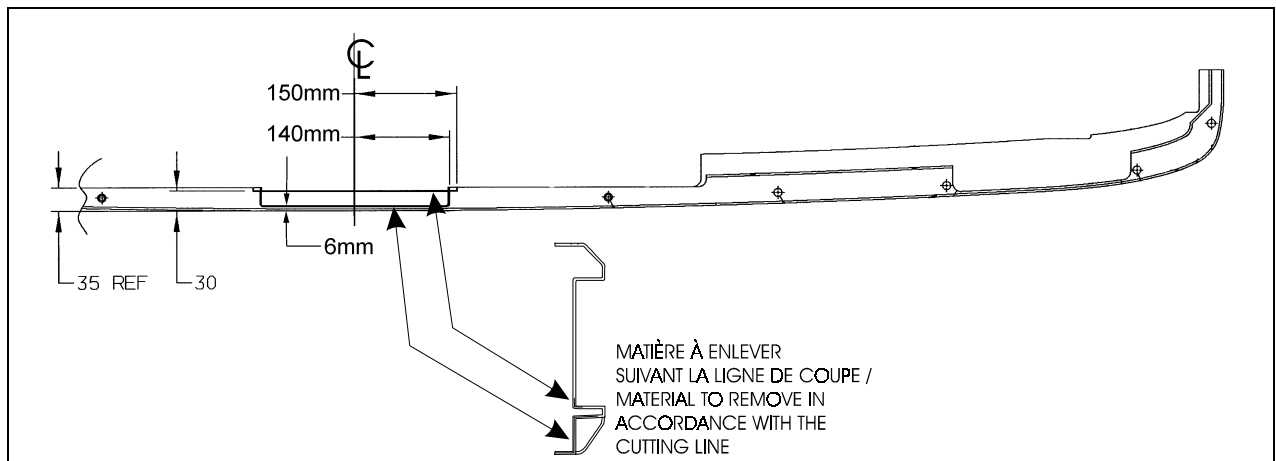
CUTTING OF REAR BUMPER FOR XL2 SERIES VEHICLES. REPRESENTATION OF A LONGITUDINAL SECTION OF THE LOWER HALF OF THE BUMPER.
